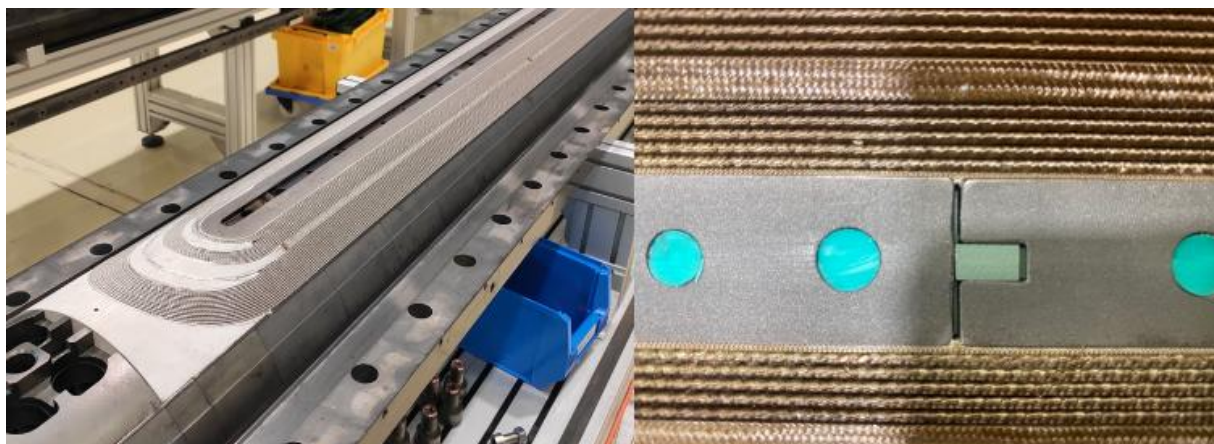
Pictures of reacted 7.2-m-long HL-LHC MQXB quadrupole magnet coil Q128 manufactured without ceramic binder on its outer surface. Left: view of outer coil surface, which appears more silverish and cleaner than before. Right: view of inner coil surface in the vicinity of a Ti-alloy pole junction, with no evidence of inner pole turn protrusion and of insulation degradation (Courtesy of N. Lusa, CERN).
